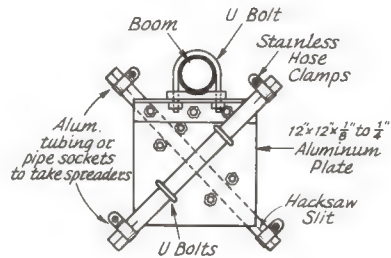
Another type of quad-spreader mounting. Pipe sockets for the spreaders are fastened by means of U bolts to a plate suspended from the boom. The plate is attached to the boom making use of an angle bracket, and an additional U bolt (W6JIC).
